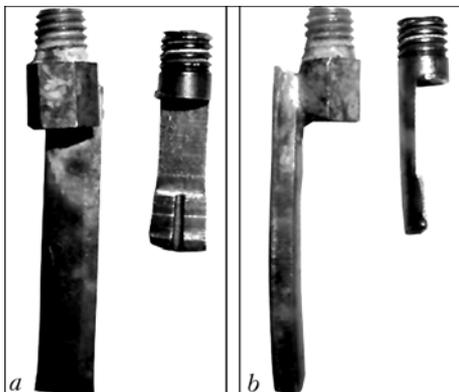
Typical designs of current-conducting tips of eccentric fitting type: a — front view; b — side view
